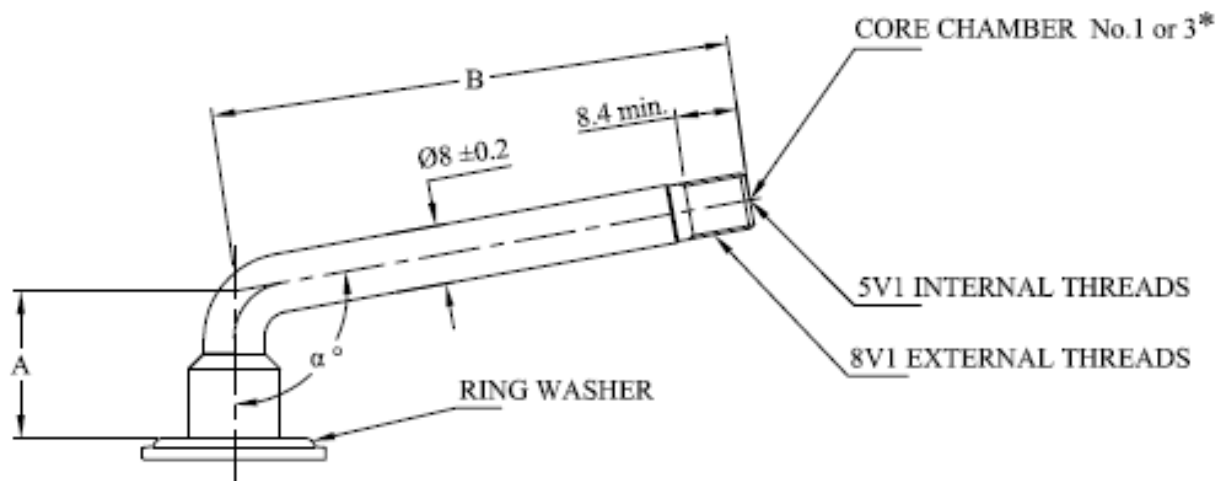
SCREW-ON UNIVERSAL TUBE VALVE HEAD
